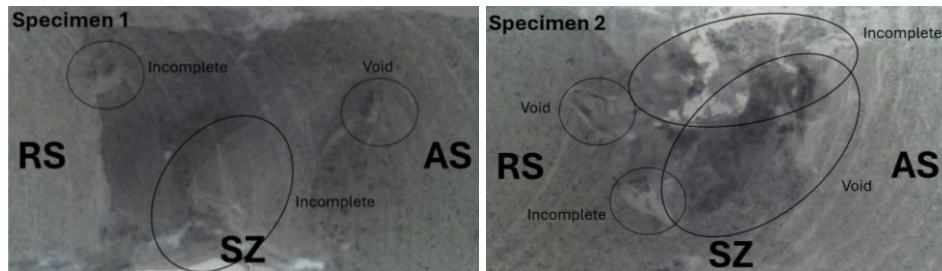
(a) Photo of macro structure of FSW result of plain cylindrical tool specimen 1, (b) Photo of macro structure of FSW result of plain cylindrical tool specimen 2
